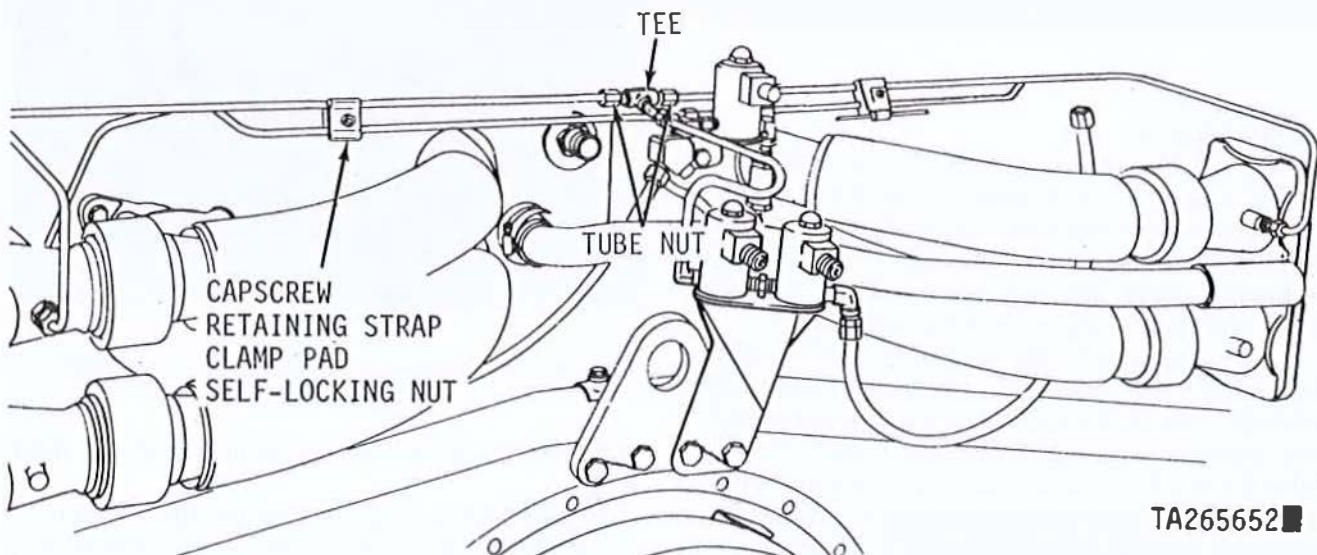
Removing or installing smoke generating system fuel tubes, model AVDS-1790-2C and AVDS-1790-2D engines.
